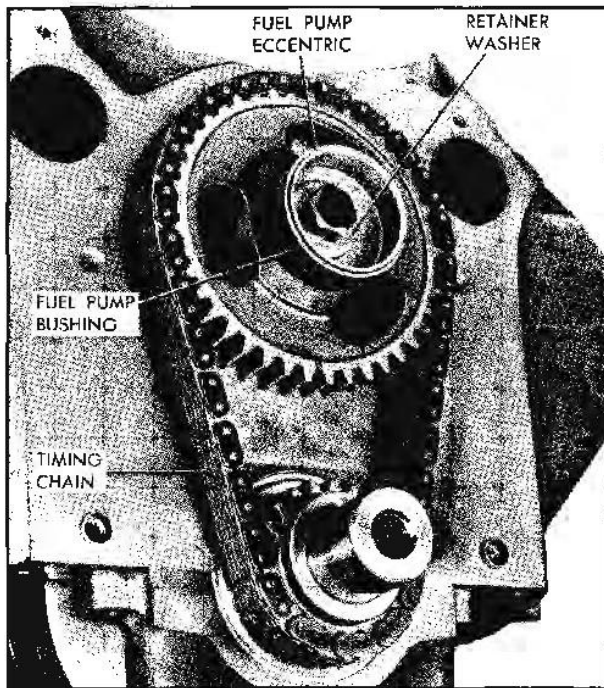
Front of Engine With Timing Chain Cover Removed
